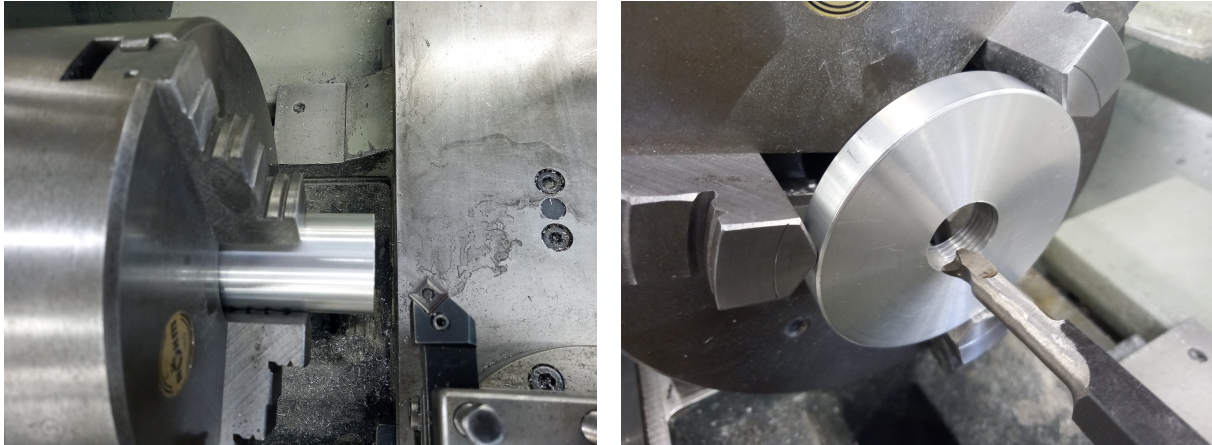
(a) Spacing ring turning (b) Threading the drawbar handwheel
